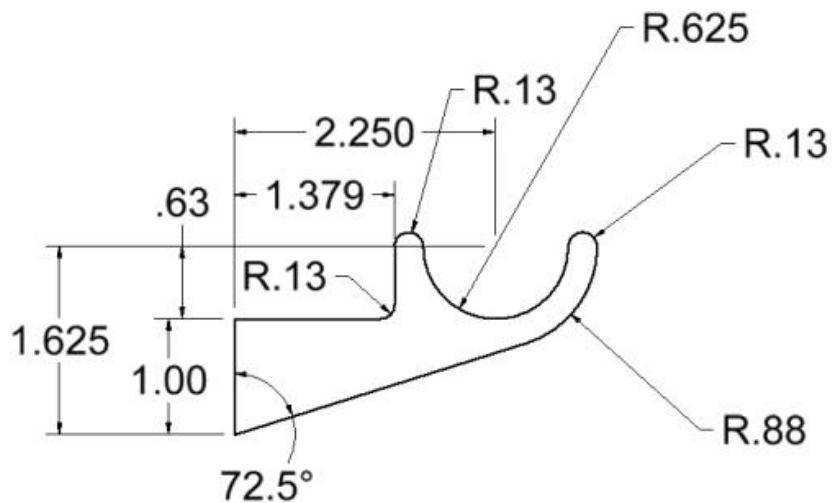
Mechanical drawing of valve support arm (Support Stand Item 4)
